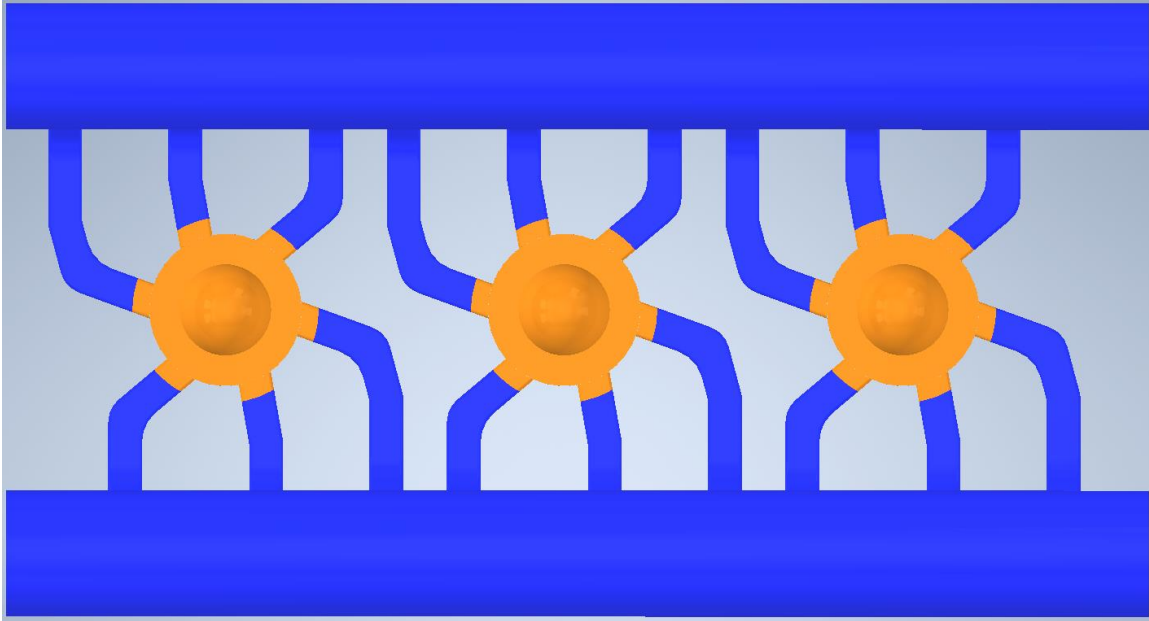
Top down view of the intake manifold for the swirl opposed piston engine
